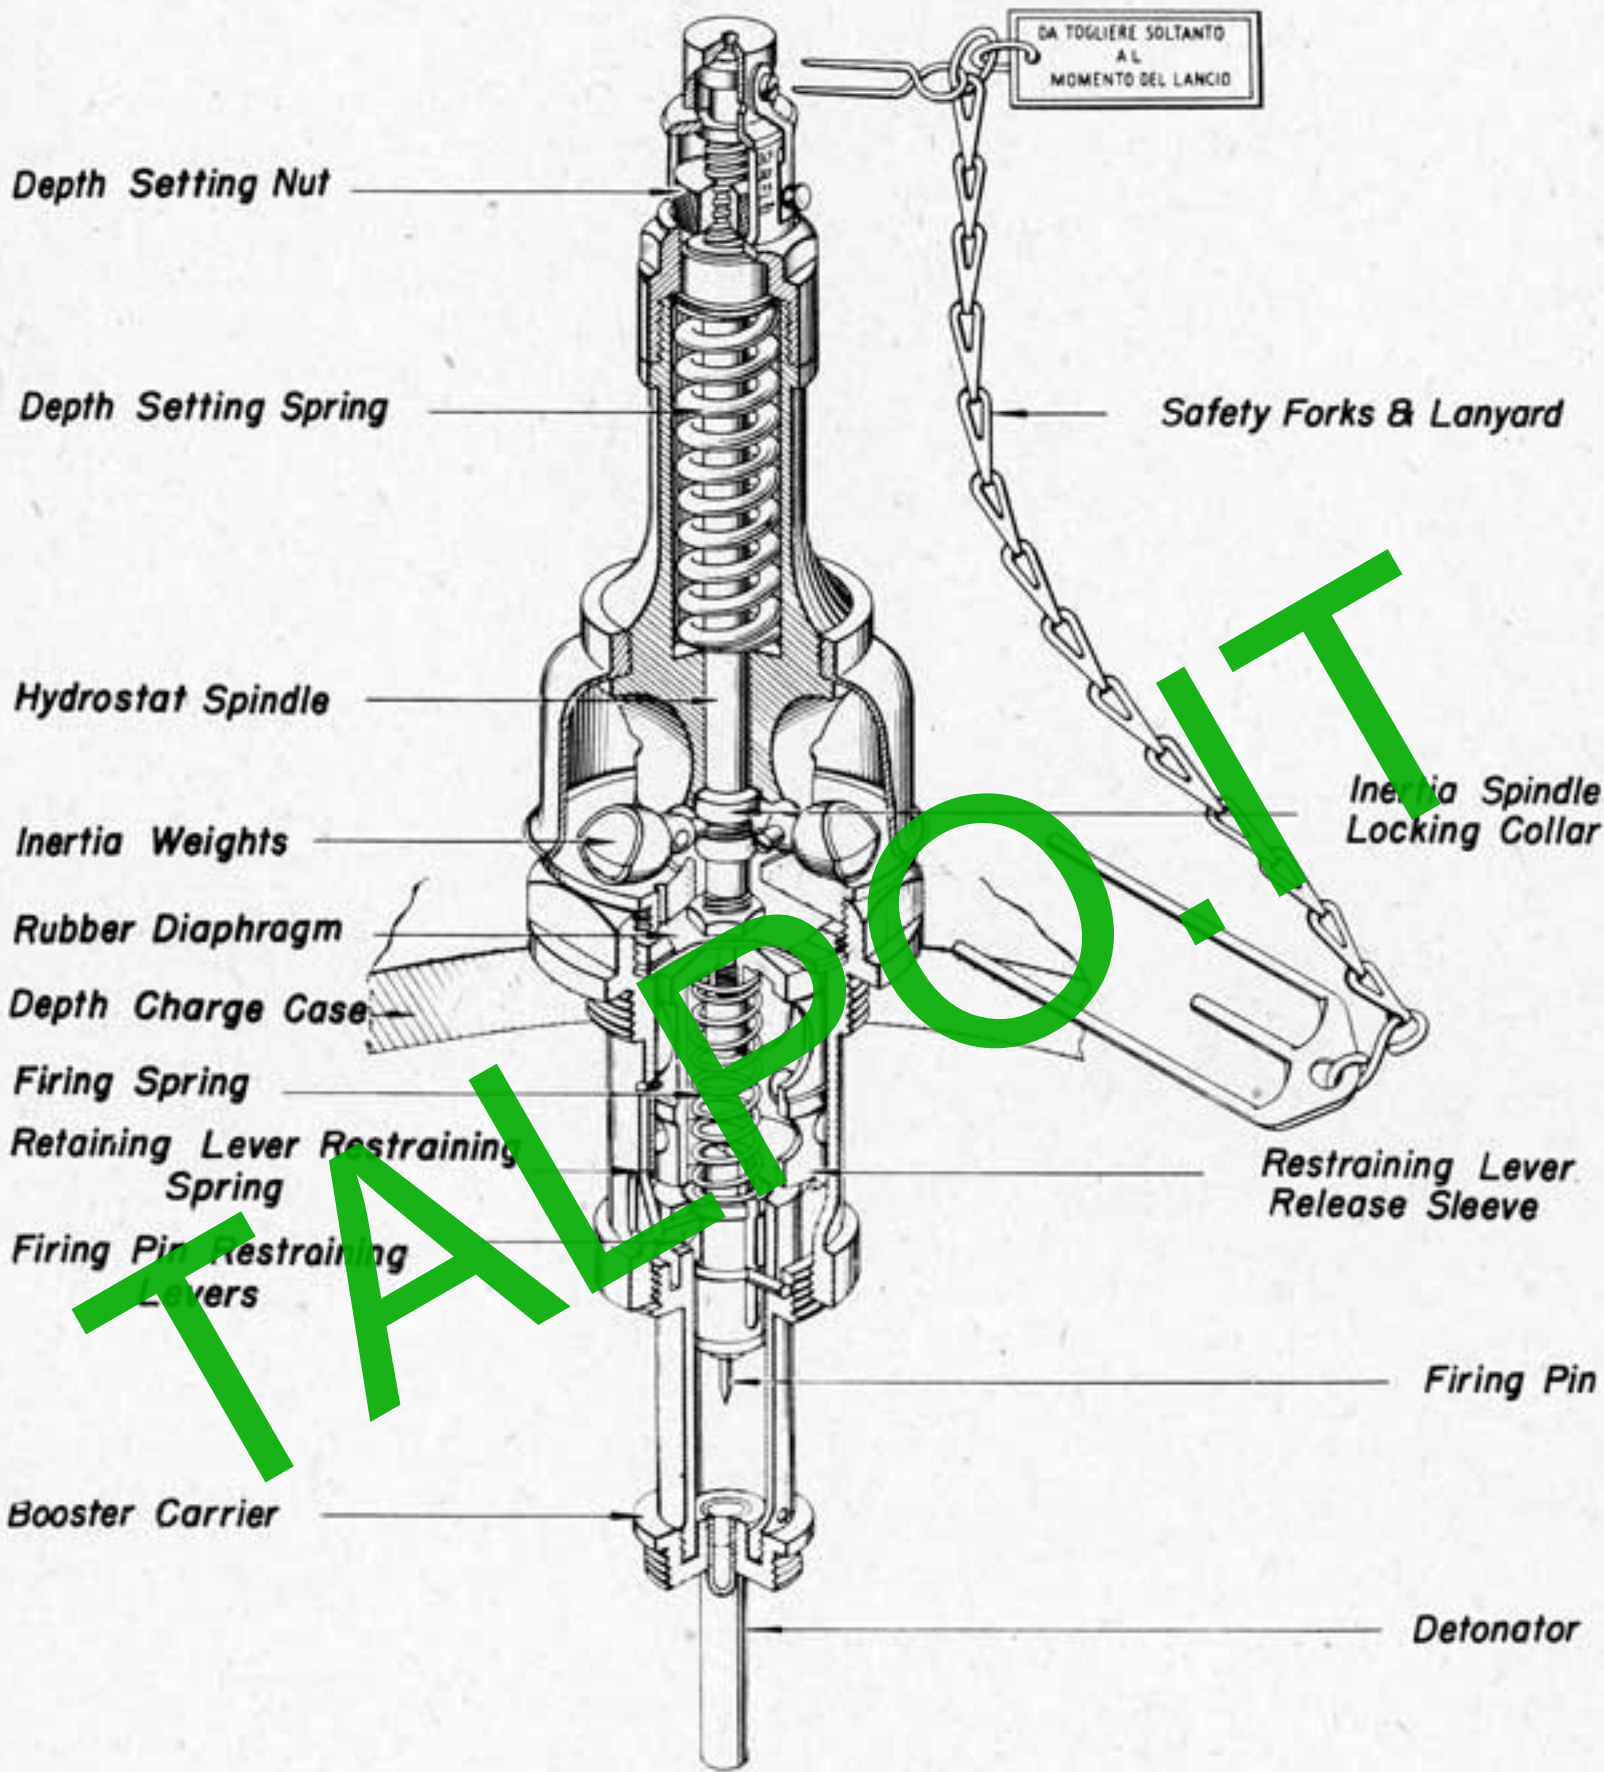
Depth Charge Pistol Type A, Sectional View.
